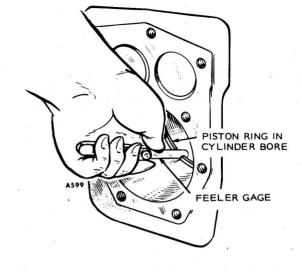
FITTING PISTON RINGS TO CYLINDER
